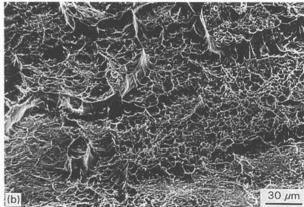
Fractographs of tensile tests carried out at 700 °C of bonds made (a) using the nickel braze (BNi1a), (b) using the iron-base foil.
